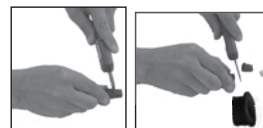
& 5 When using USSB with GTO wire and 3730 GOTOSLEEVEING, you must cut the USSB along the 2nd rib to remove the two first sections of the bushing (the ones with the two small holes). Make sure to grasp the flanged end of the USSB prior to cutting to reduce the likely hood that the piece you need to keep would fall to the ground.
